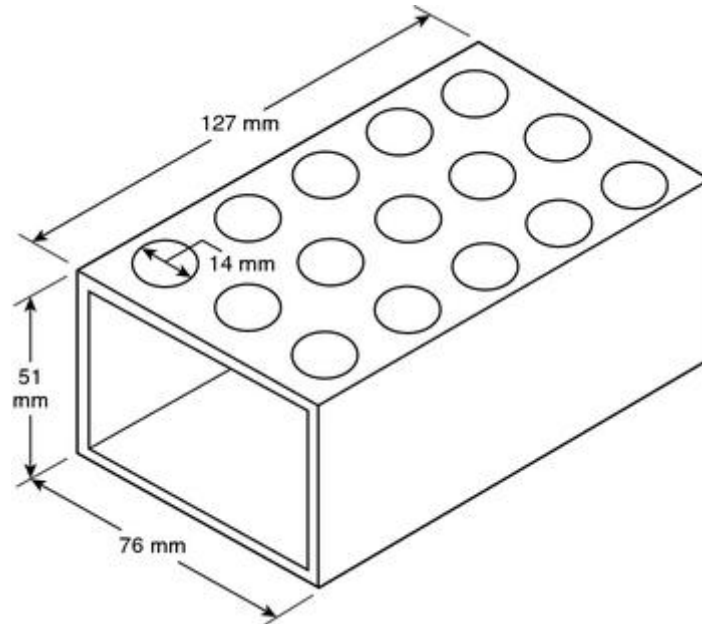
Calibration Jig Used for Checking the Uniformity of Irradiance.
